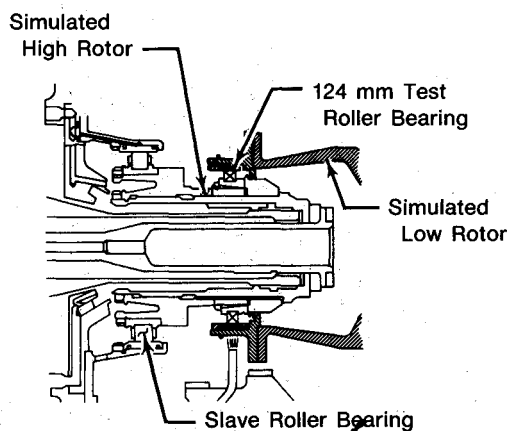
Counter-rotating intershaft support bearing rig test section.
